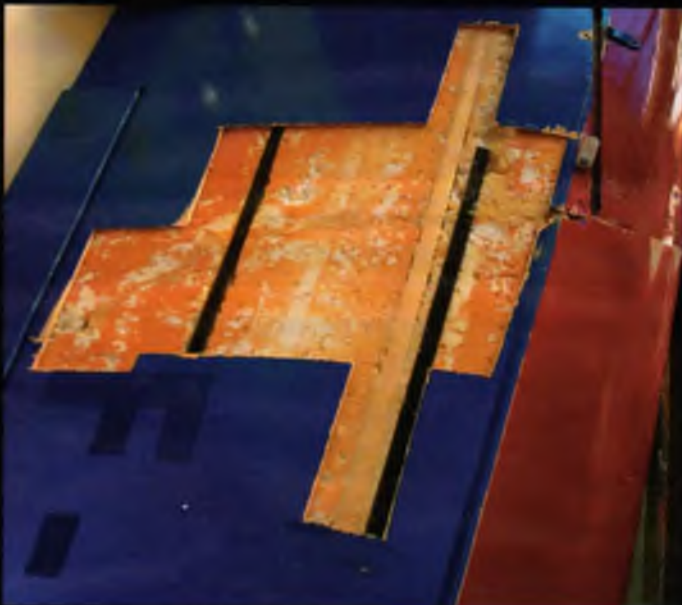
The bottom of the wing with the spar installed, now ready for sheeting.
